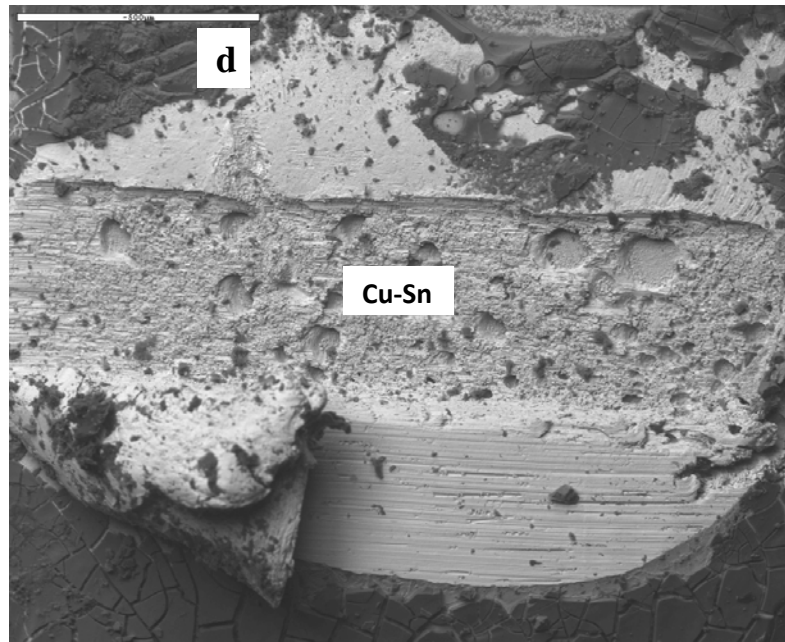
Fracture surface of the interface formed between Sn-3.8Ag-0.7Cu solder alloy and pad as-reflowed
